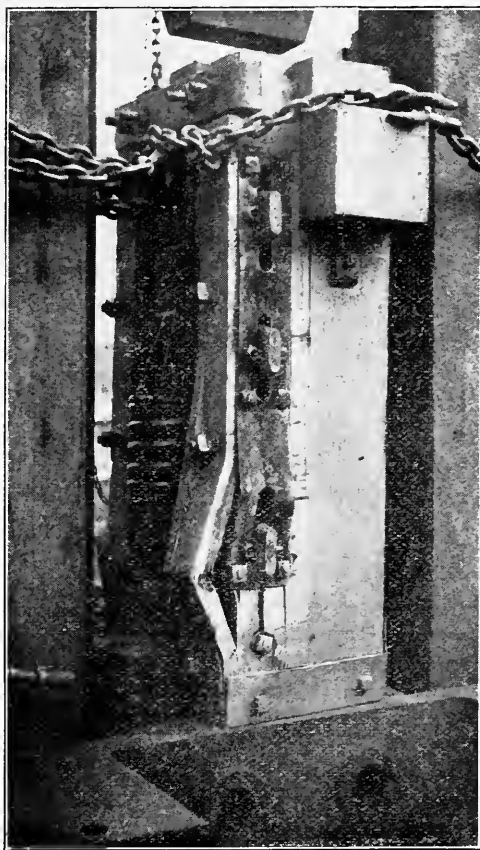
DRAFT GEAR AFTER DESTRUCTION.
